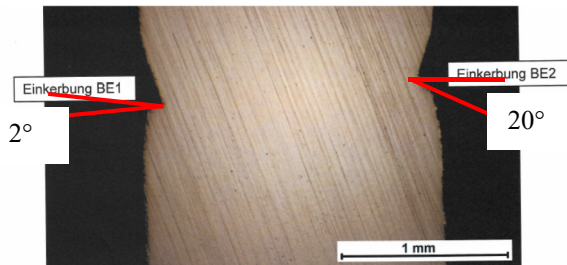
3D picture of microscope inspected the knife edge of a copper gasket (rectangle to the 20 ° knife position).
